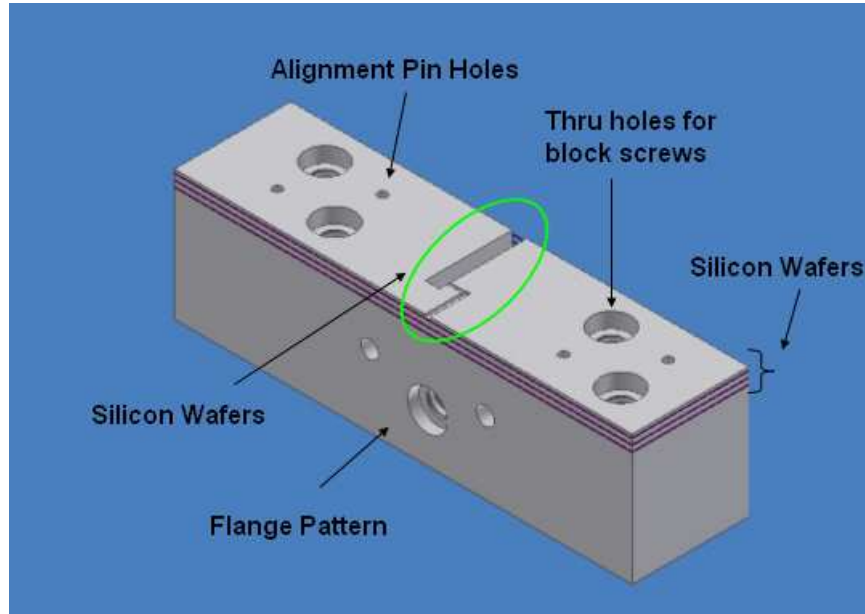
An Autodesk drawing of one half of the multiplier measurement fixture with 3 silicon layers shown..
